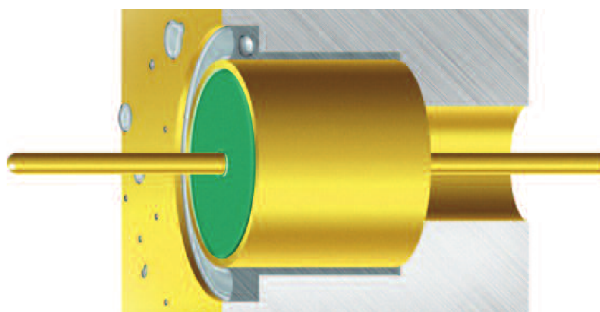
Drawing of a bit perl connector for SMA inside its hole. The central connector ends at the SMA on one side and the other end is soldered onto the pad in the diode board. The receptacle has to be carefully milled to hold the perl bit correctly
